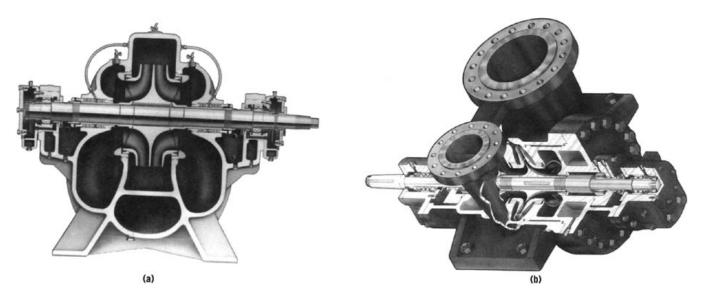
Single-stage between-bearings double-suction pumps: (a) axially split design; and (b) radially split design.(Courtesy of Goulds Pumps, Inc.)
